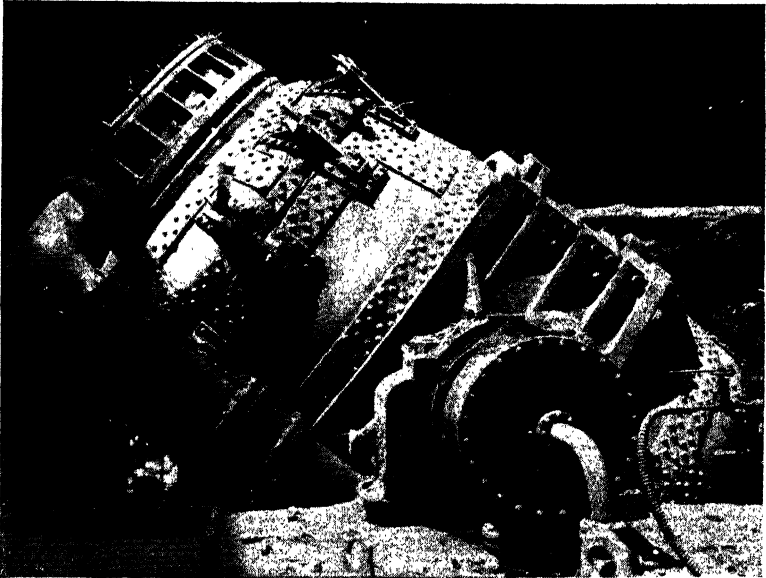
II.—View of an eccentric converter showing external details of the bottom.
